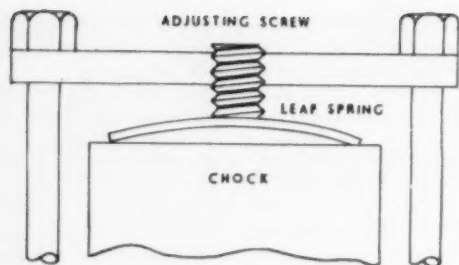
(above).—A Hinge mill with a leaf spring to give a high initial spring
